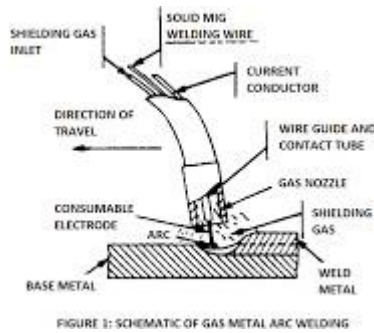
MIG welding process (Mig Welding Guide, n.d.).
